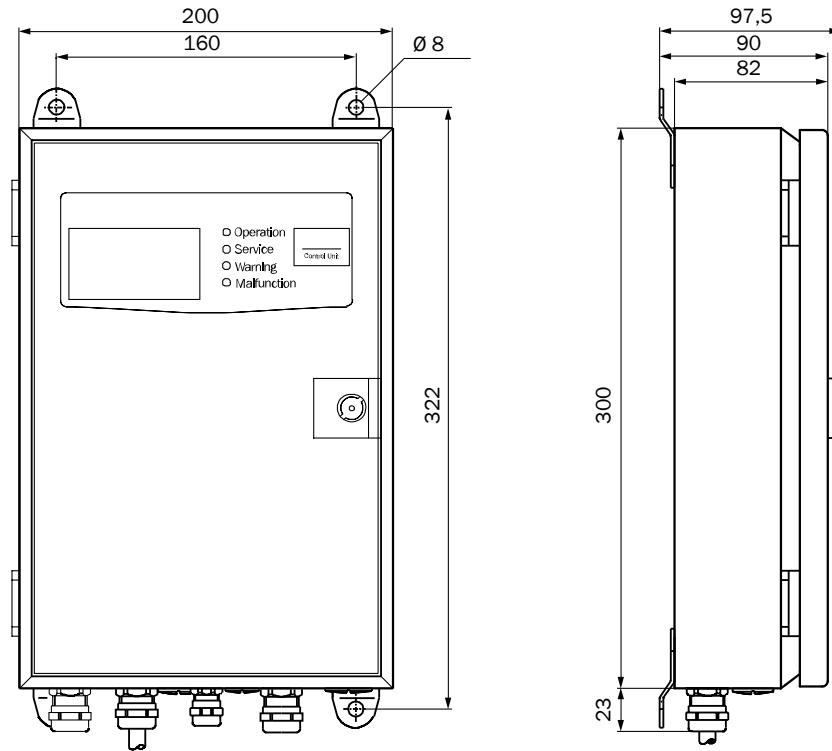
Fitting the control unit AWE (sheet steel enclosure version), dimensions in mm
